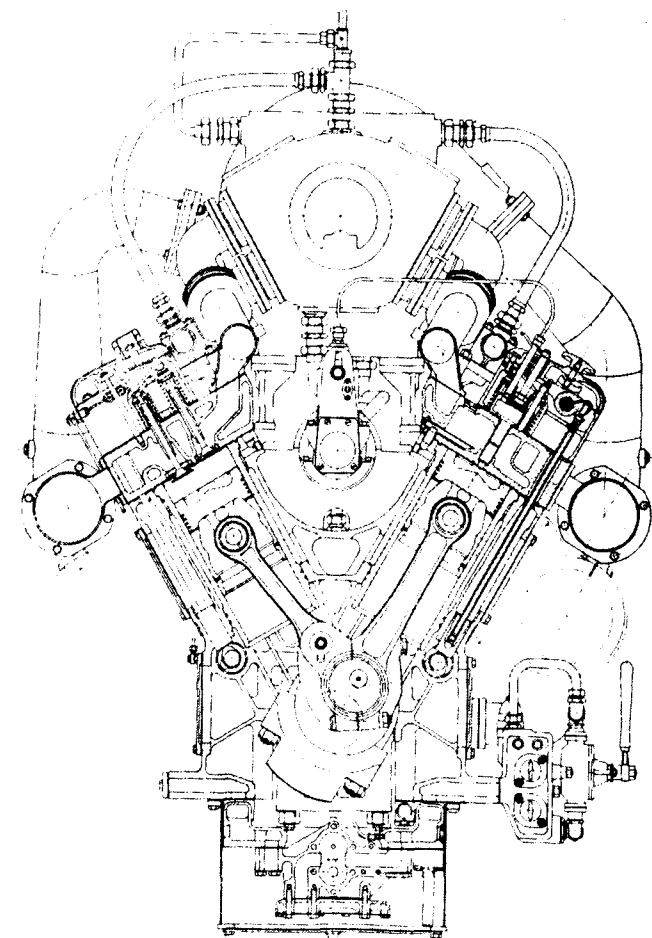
Cross section of the M.G.O., or Grosshans, V-engine with 60-degree angle between the cylinder banks. This view shows the pressure-charged engine which develops a maximum of 62½ b.h.p. per cylinder at 1500 r.p.m.
